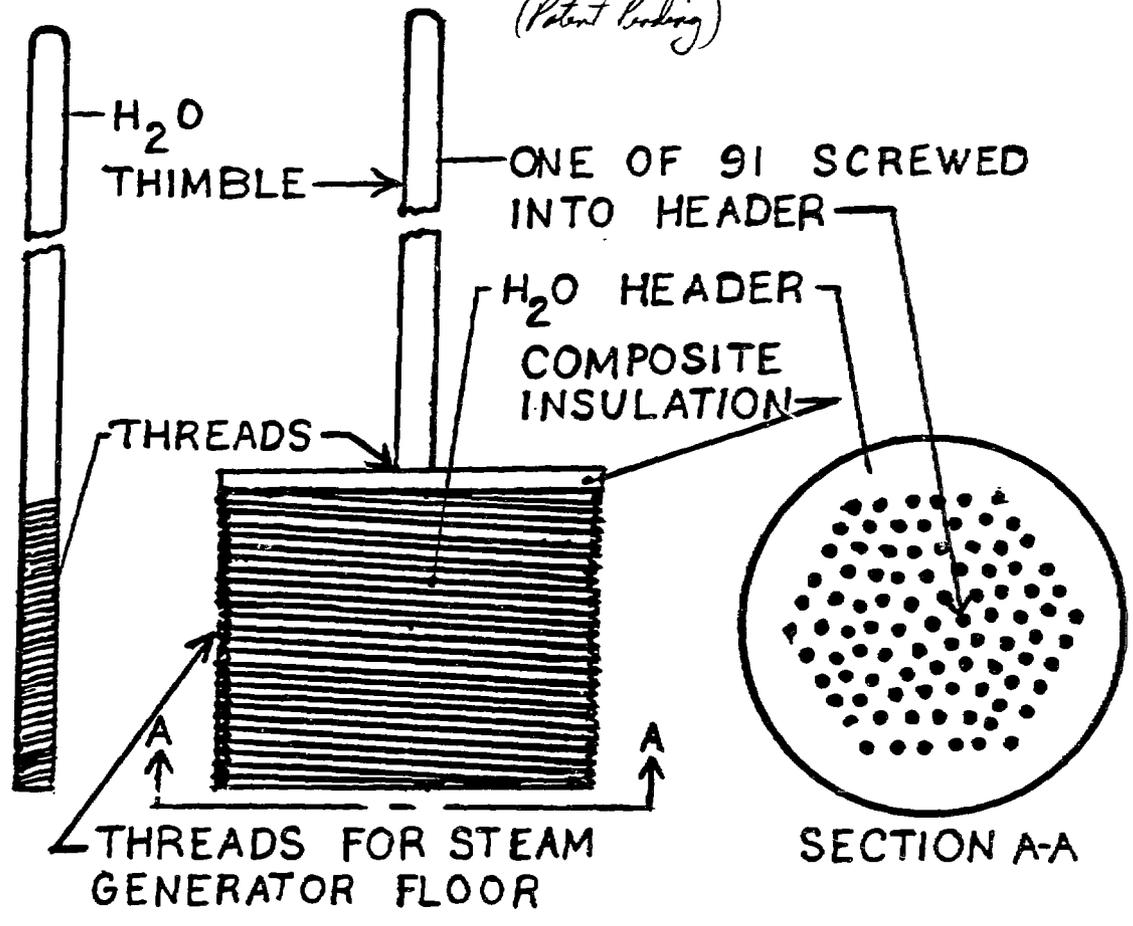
H₂O Portion of Reflux Capsule Assembly
